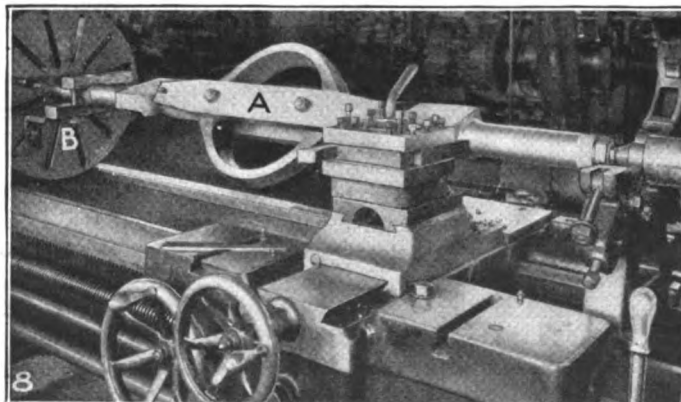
FINISH-TURNING THE ENDS. FIG. 9. MILLING THE SPRING PAD
